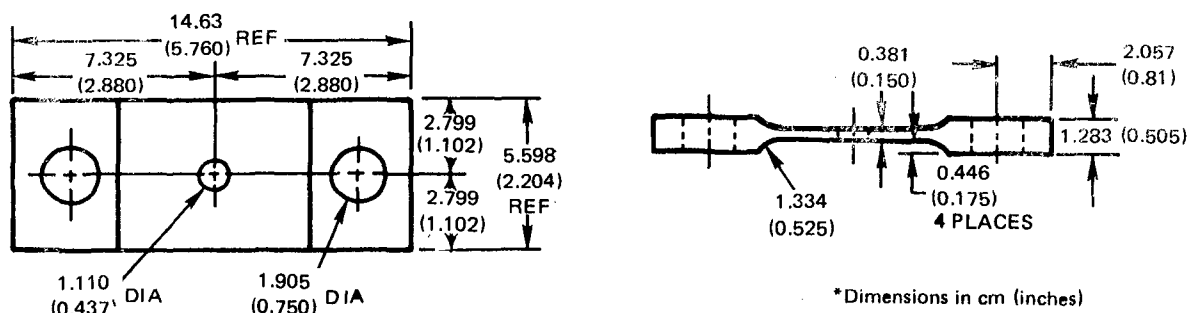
Bolt-Hole ($K_t = 2.5$) Low Cycle Fatigue Specimen
